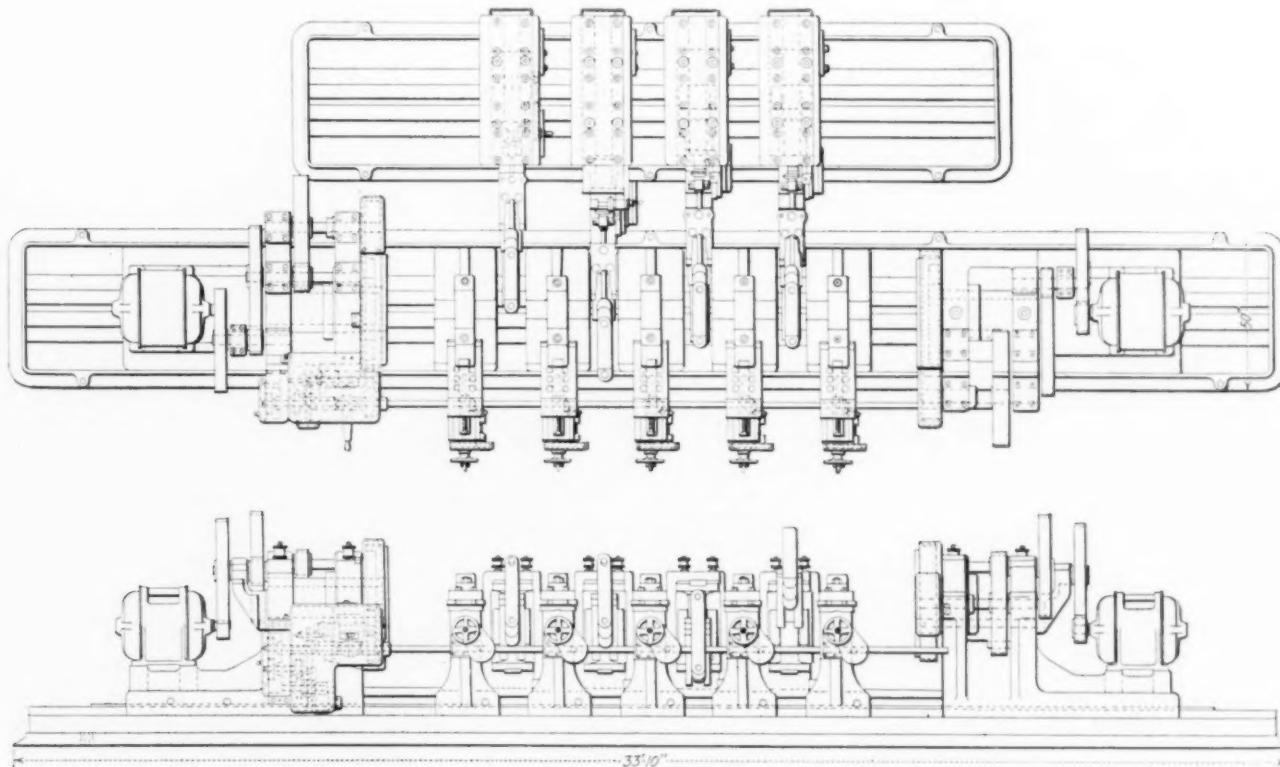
DETAILS OF CRANK-SHAFT LATHE
